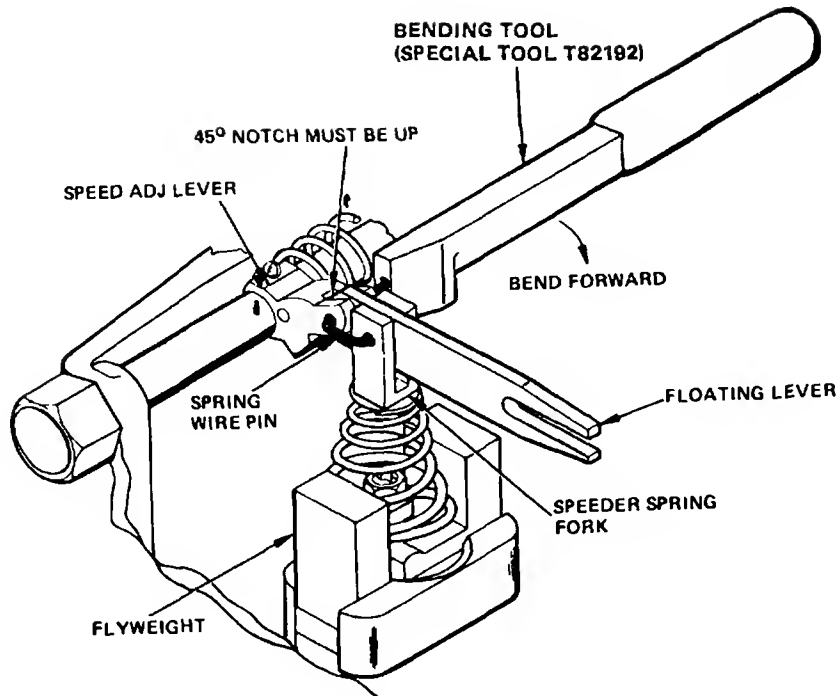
Governor Speed Adjusting and Floating Lever Assembly
